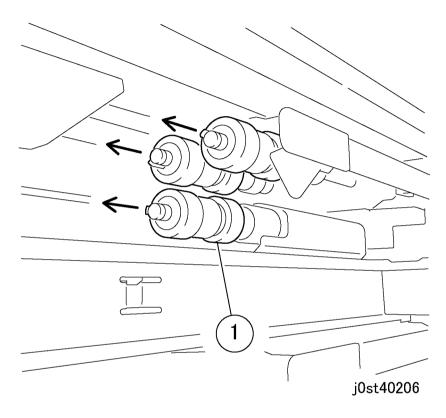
Removing the Feed/Nudger/Retard Roll (j0st40206)
